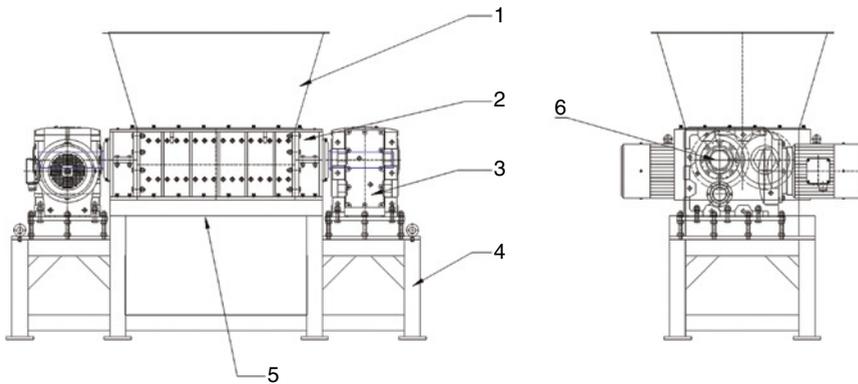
Two-shaft shredder. 1 – Feeding hopper; 2 – crushing chamber; 3 – driving device; 4 – frame body; 5 – discharge port; 6 – cutting tool.
